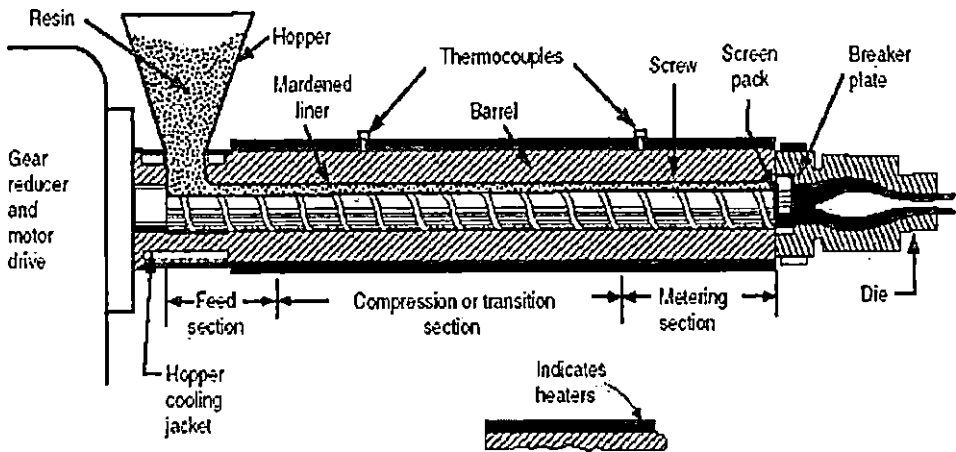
Single screw extruder (Ref: Fellows, 2000)
